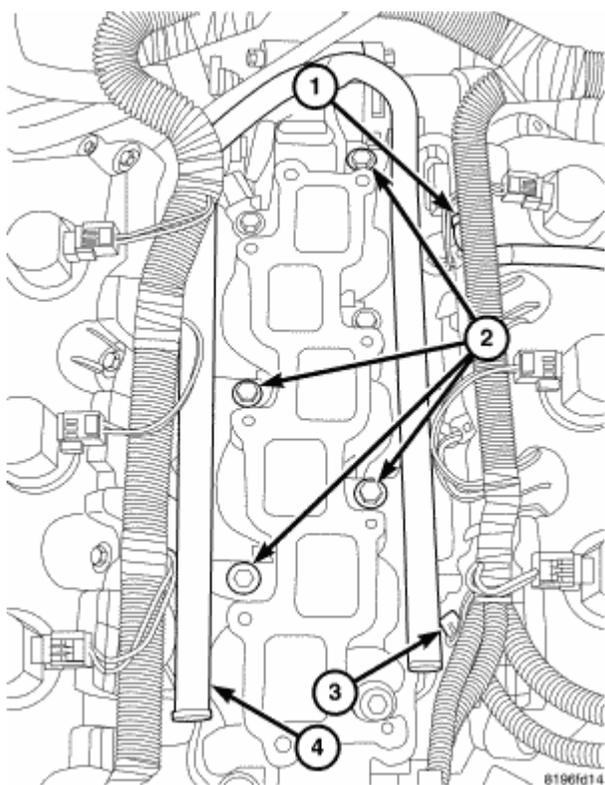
Identifying Fuel Line, Mounting Bolts, Electrical Connectors & Fuel Rail
